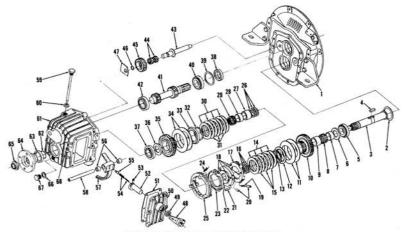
Exploded view of KBW-10 transmission.
